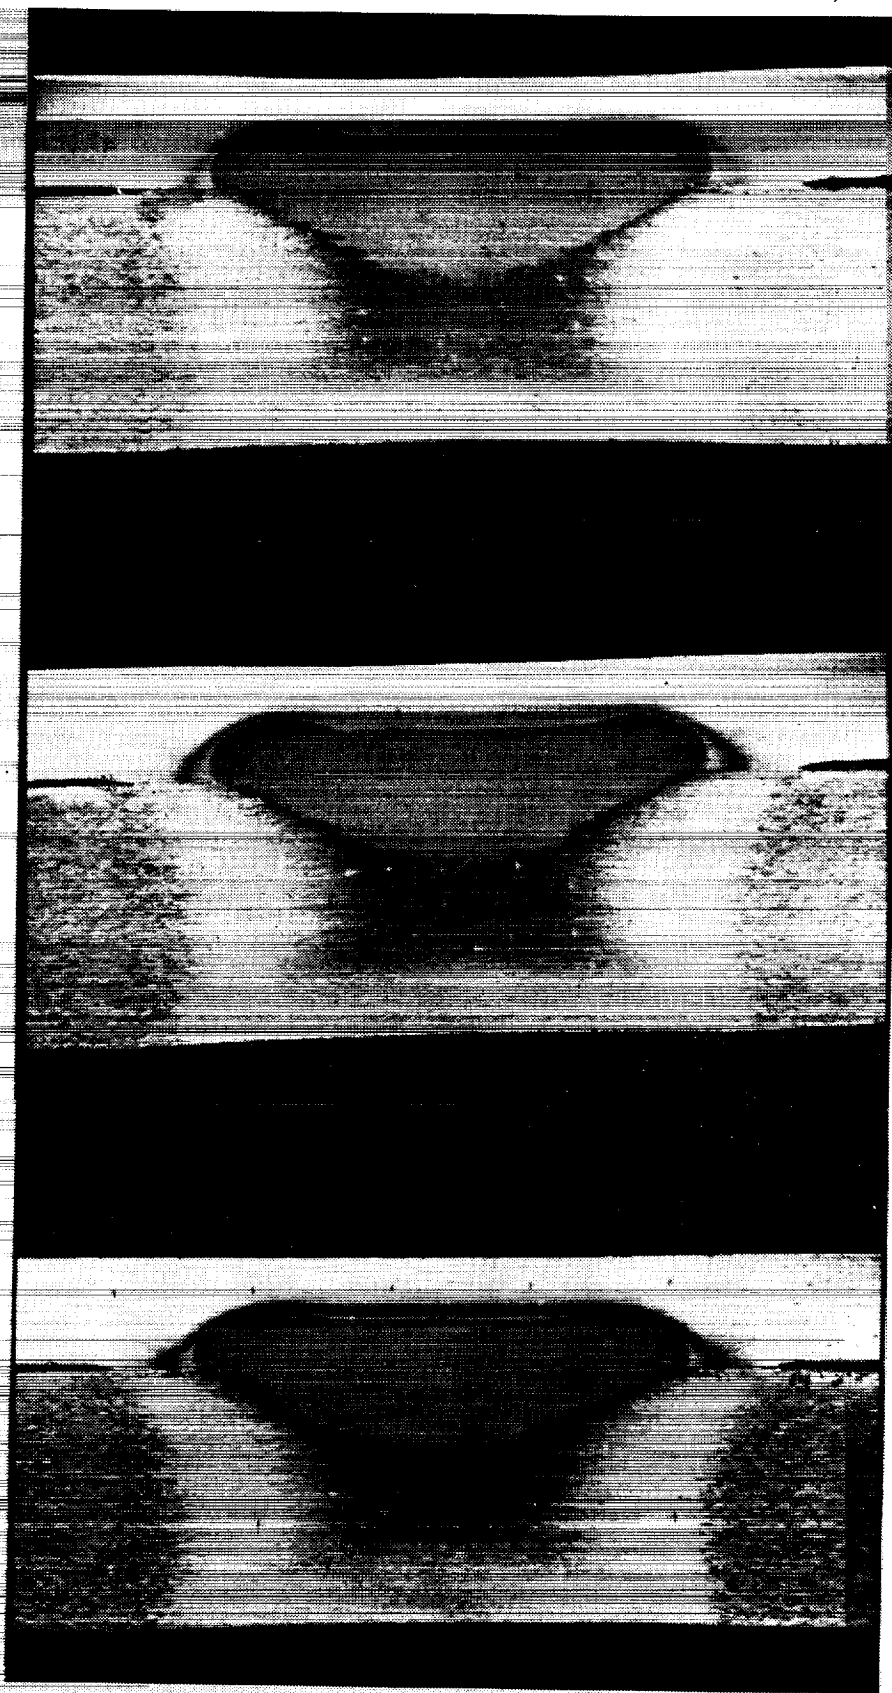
Panel 5 Pre-test Spot Weld Nuggets 0.070" 7475-T62 joined to 0.190" 2219-T81 Al.
